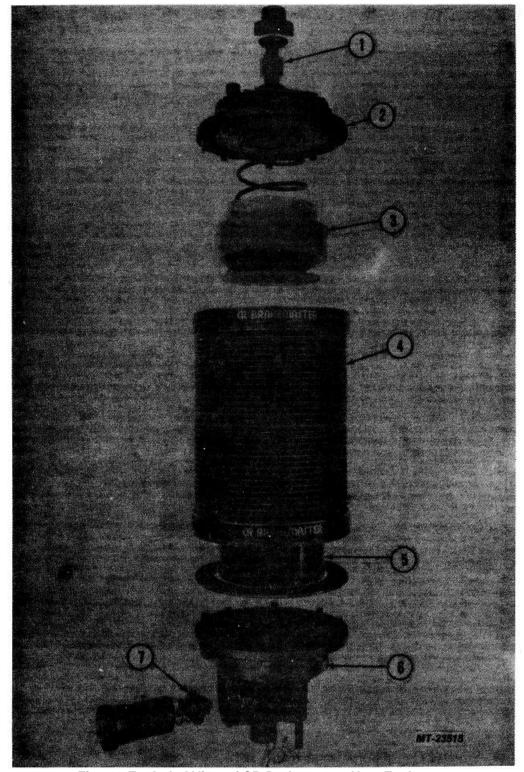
Exploded View of CR Brakemaster Heat Exchanger
